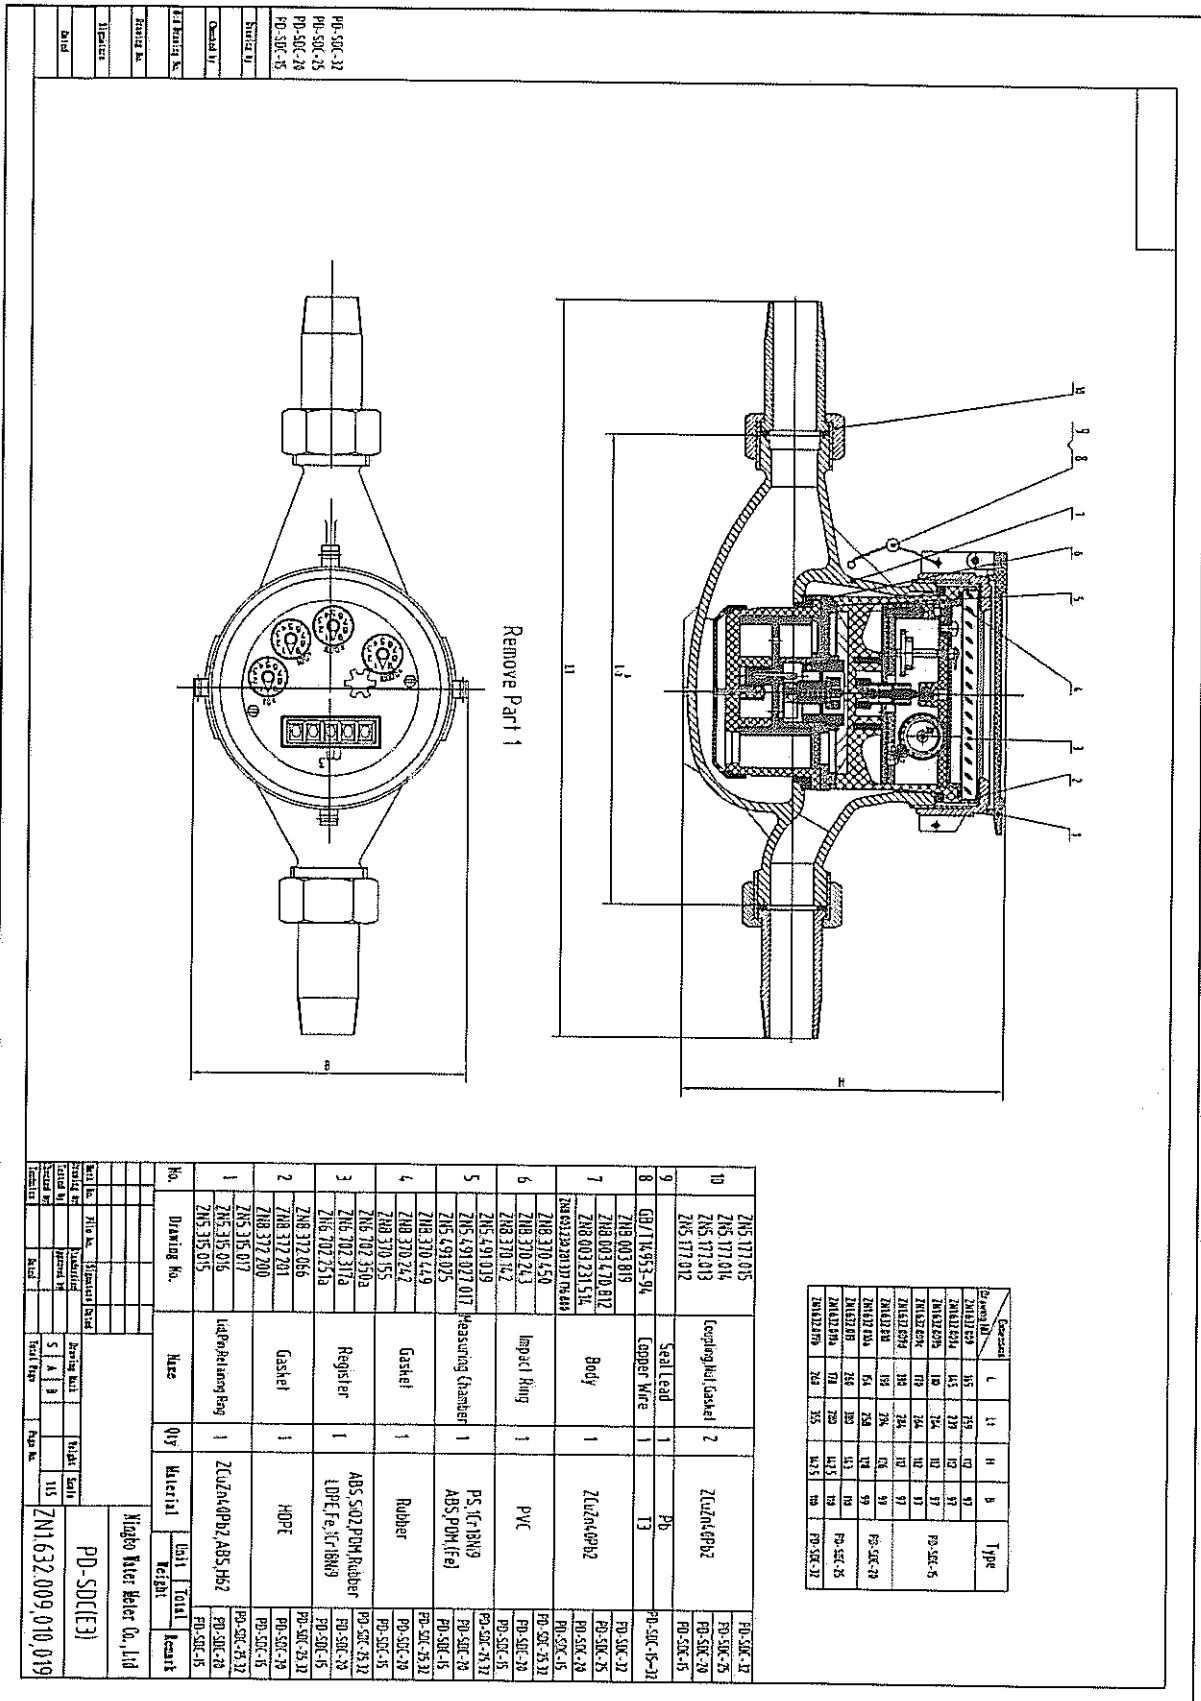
The water meter type PD-SDC (E4) assembly drawings:
